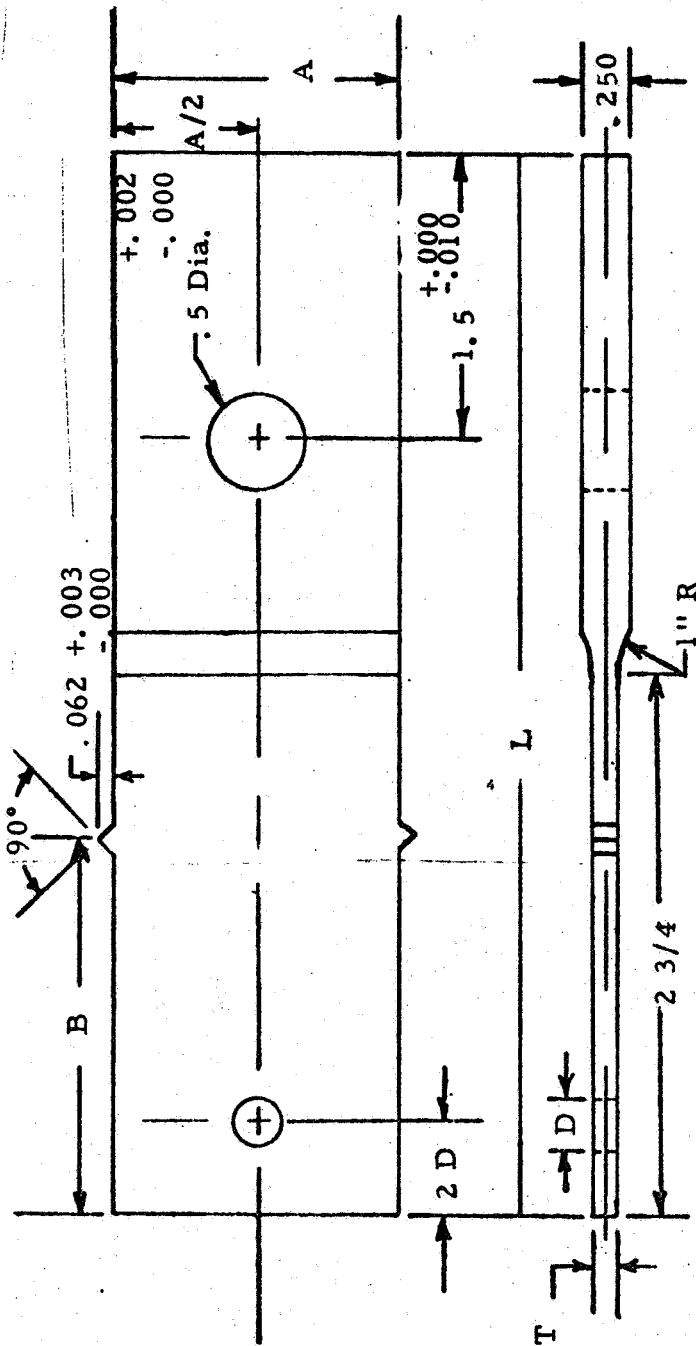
Beryllium Lap Joint Specimen for 100° Flush Head Bolts
